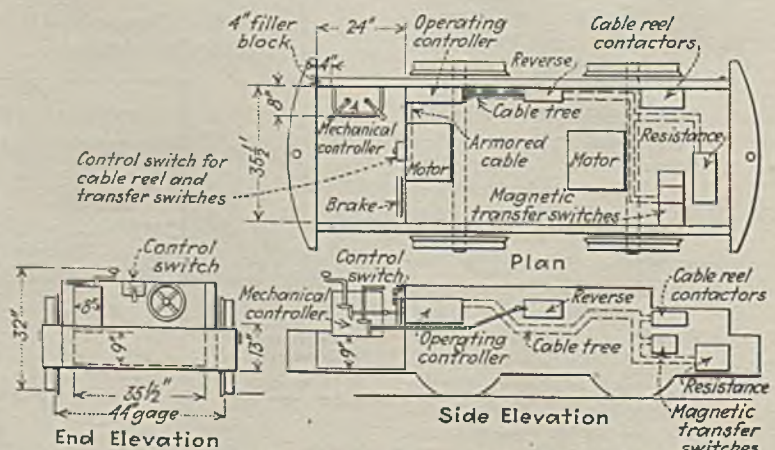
Locomotive Equipped With Mechanical Controller and Master Control Switch
